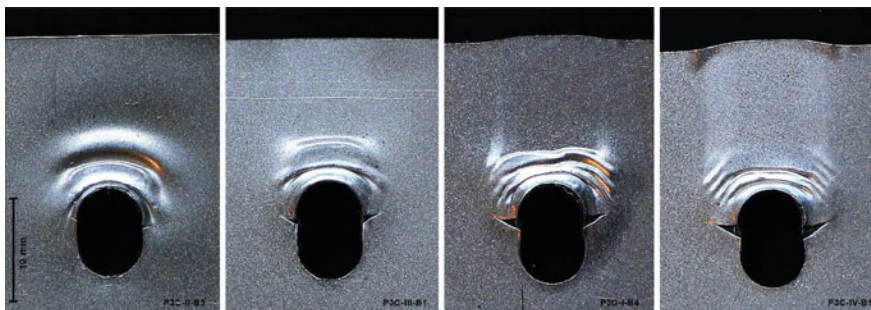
Typical combinations of buckling and bearing failure and net-section onset cracking in laterally constrained stainless steel-CFRP laminates [10]
